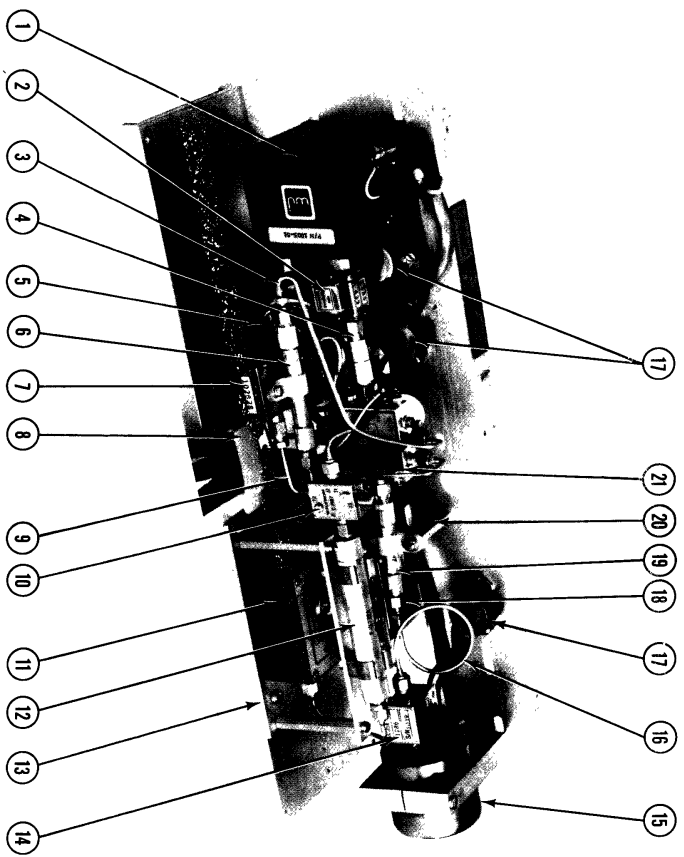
Top Assembly, Dwg. 660-D-8152,
